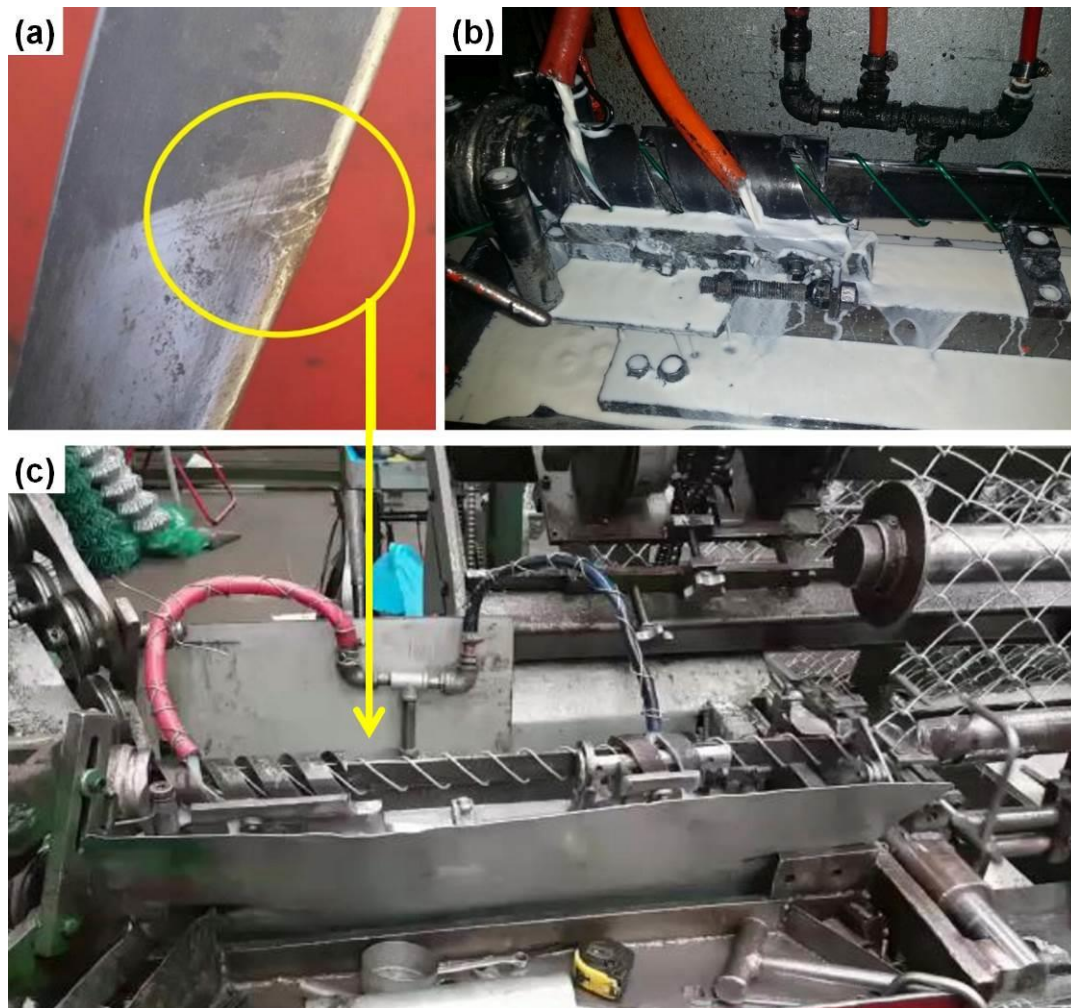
Wire-bending process in a steel-meshing equipment: (a) tool wear, (b) lubricant employed for the steel-meshing equipment, (c) tool employed for wire-bending, the first inches suffer the highest wear.
